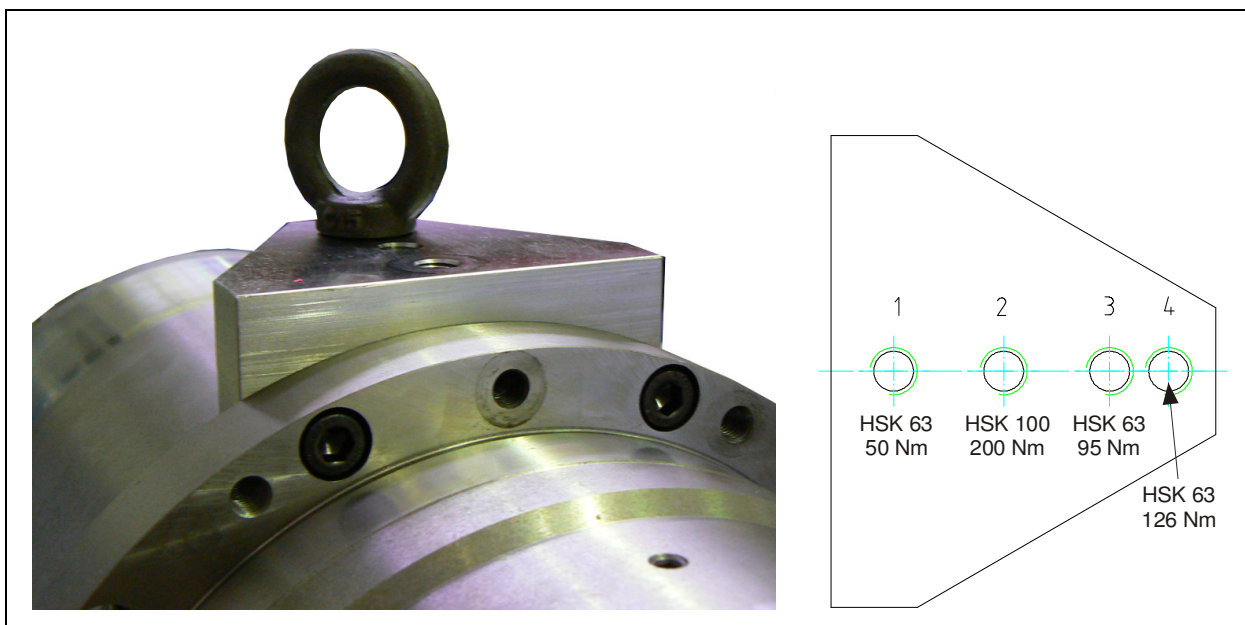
Lifting device (A.1289.7956) of the motor spindle
